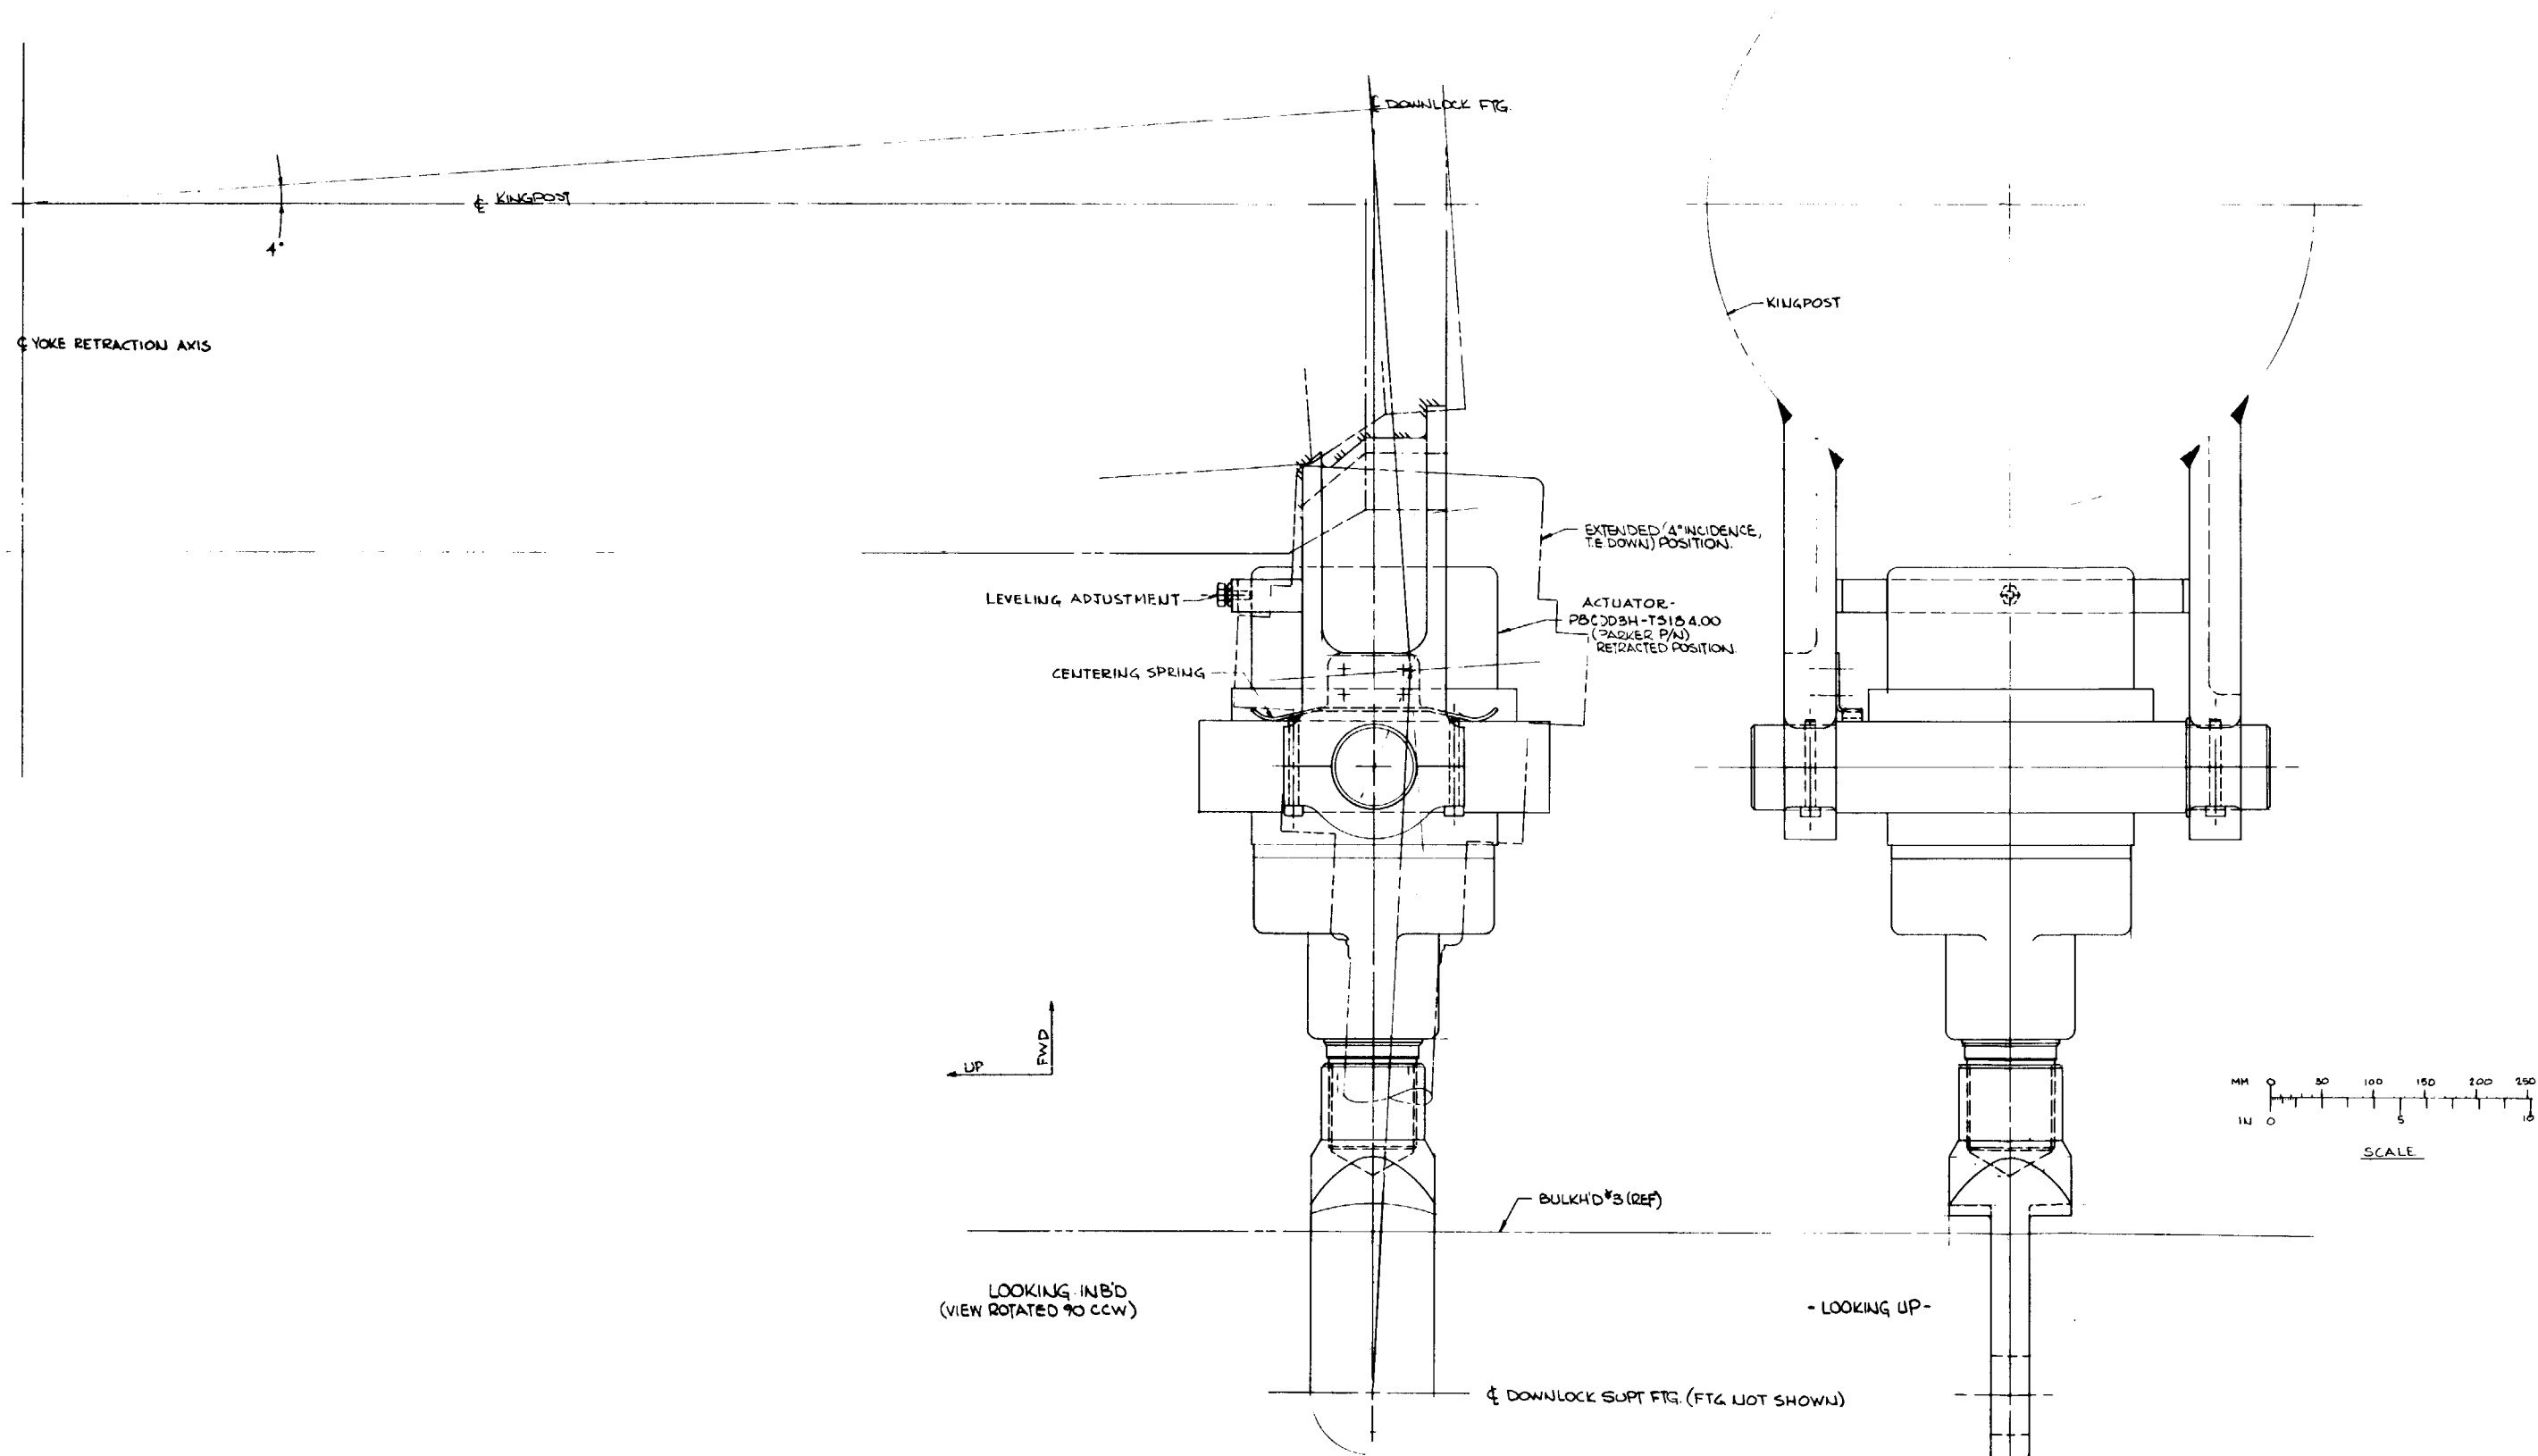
Forward Strut - Two Position Actuator Installation (U)
